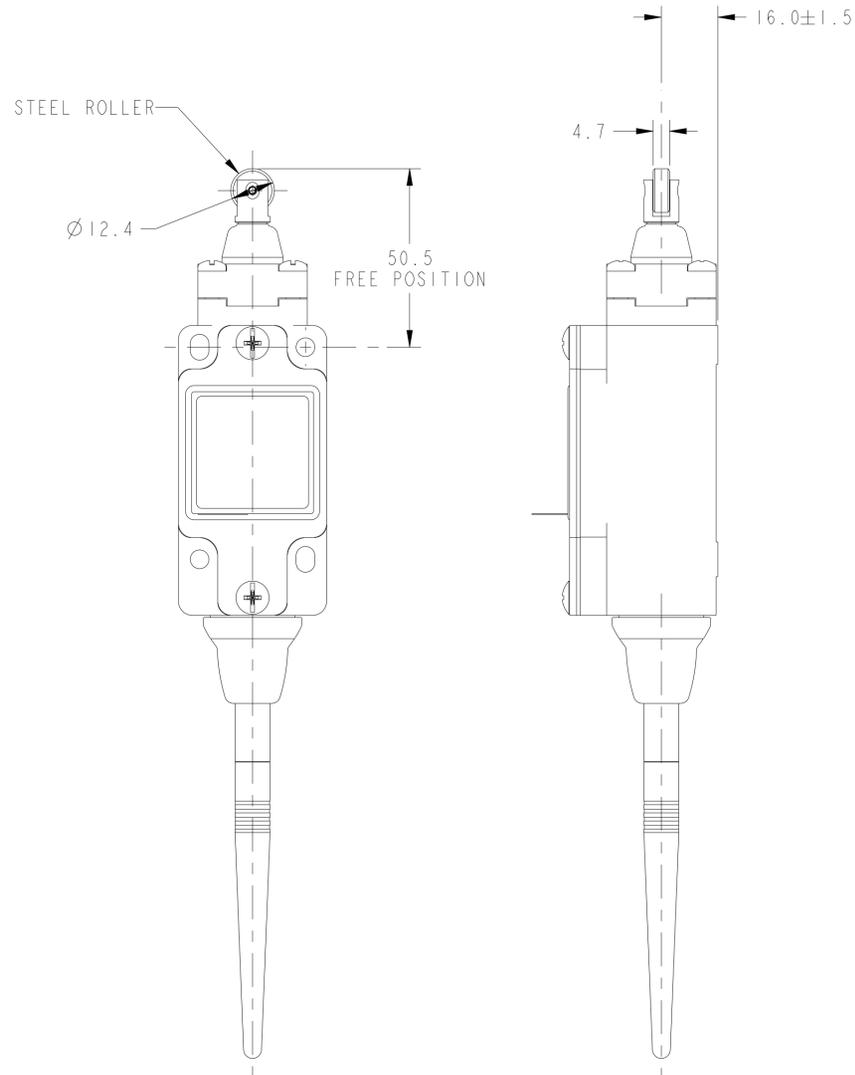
TOP ROLLER PLUNGER HEAD
